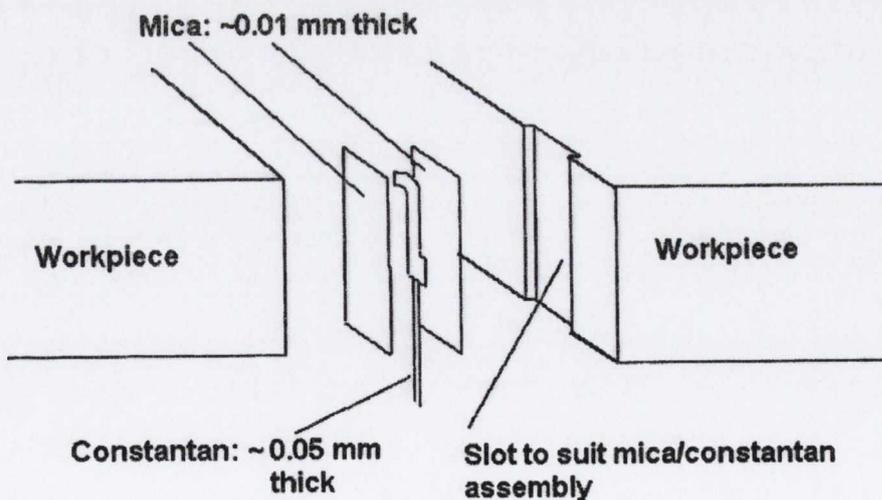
Single pole thermocouple technique used by Babic *et al.* [155]
